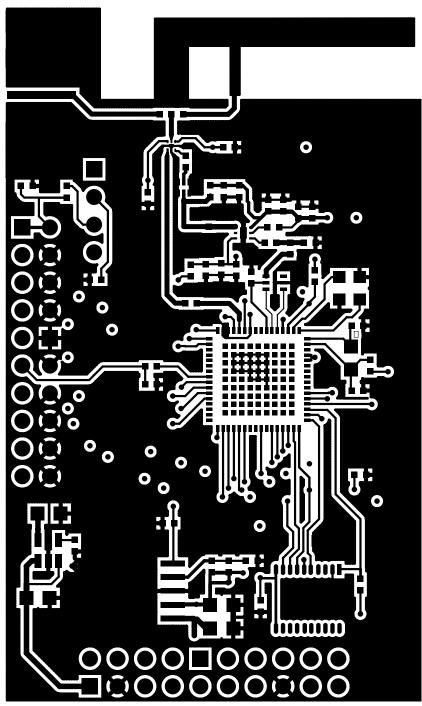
1322x Extended Range Board PCB Layout (Top View)
